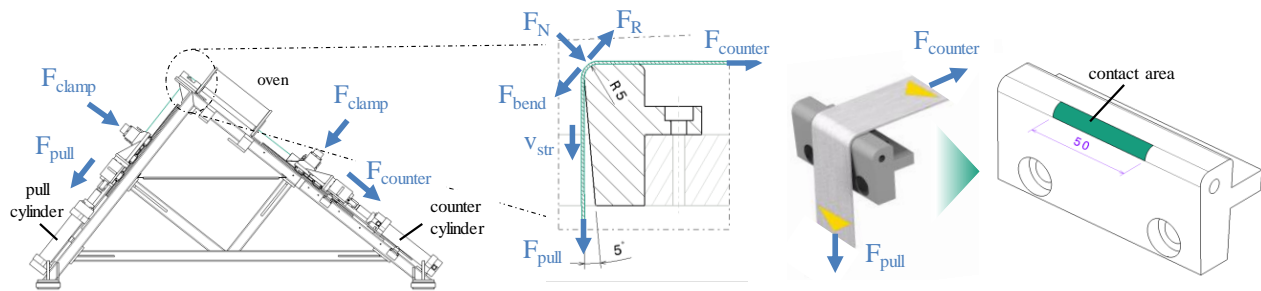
Experimental set up and principle of the deflected strip drawing test with round tools
